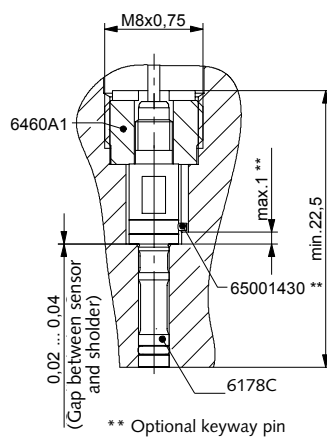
Installation Type 6178C...UMR... with mounting nut
